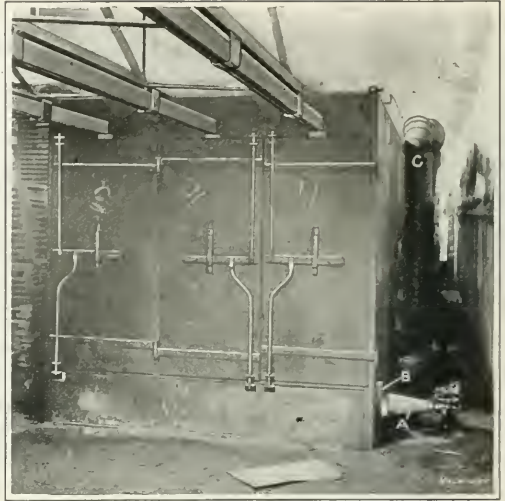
Back of Oven where Springs are pulled out to be crated. Oil Burners for heating Ovens are shown in Passageway
